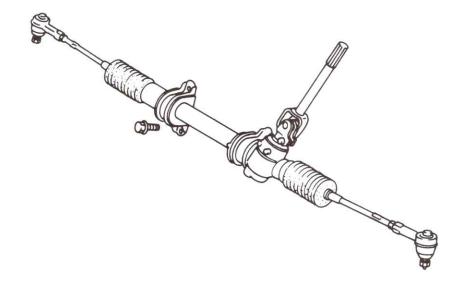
Typical rack and pinion steering assembly (Sec 1)
